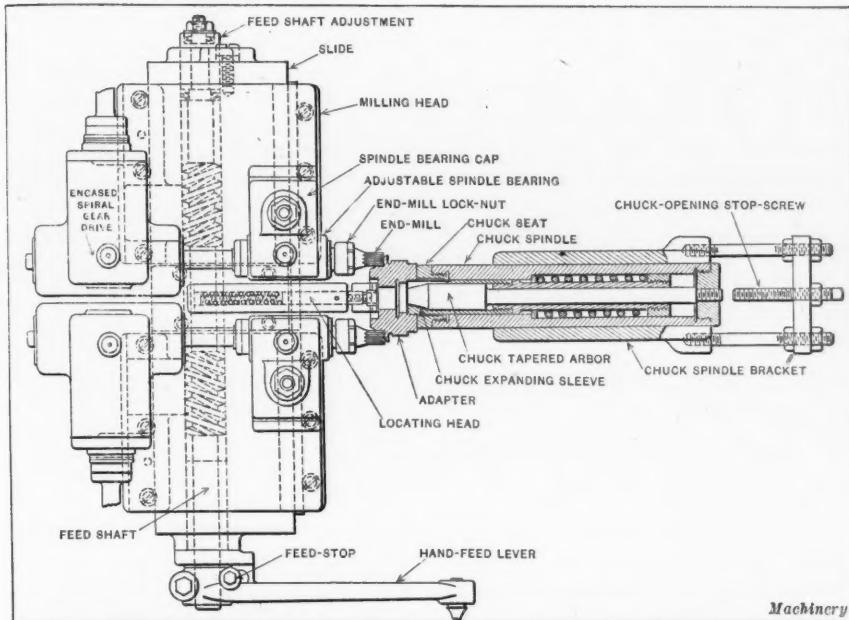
Langelier Duplex Adapter Slot Milling Machine with Chuck Spindle in Milling Position
